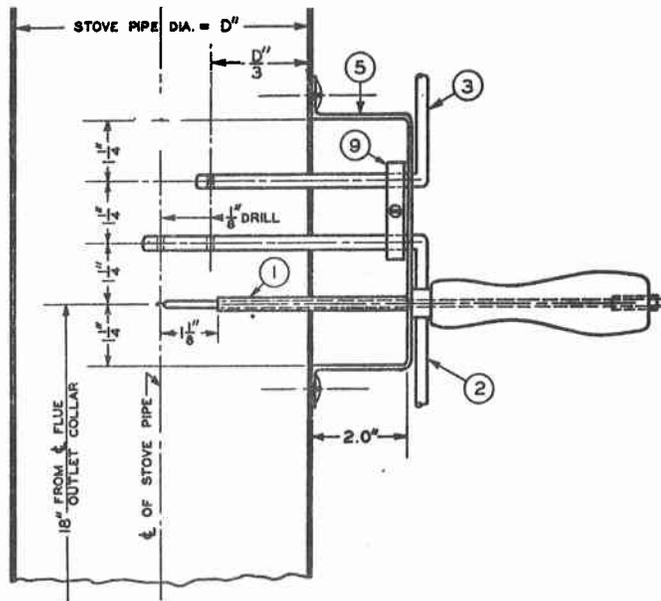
Gas-sampling and draft tubes, thermocouple and support bracket assembly.
